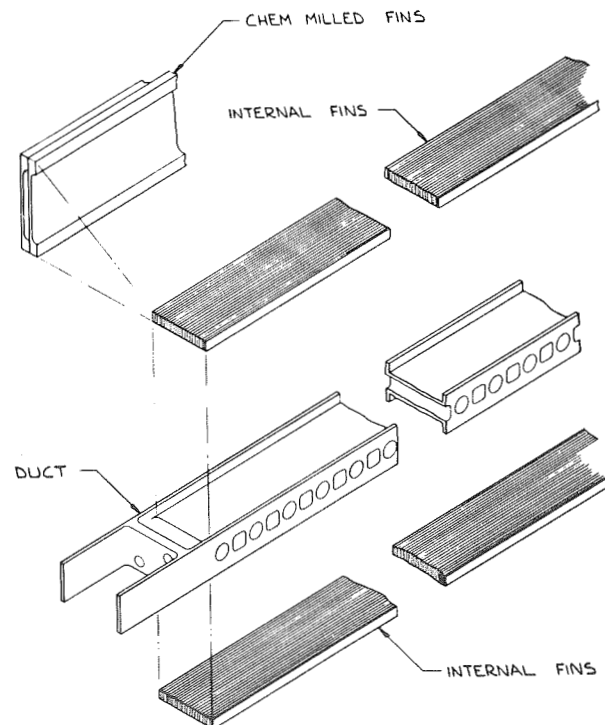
42. Vapor Chamber Fin Radiator Assembly Sequence Step 2
